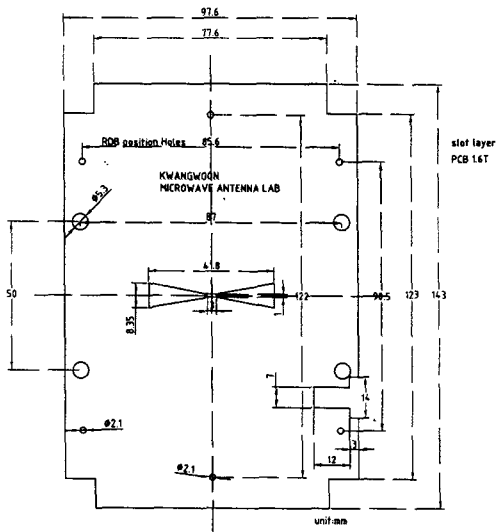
Layout for slot and ground plane ($h_1=1.6$ mm).
